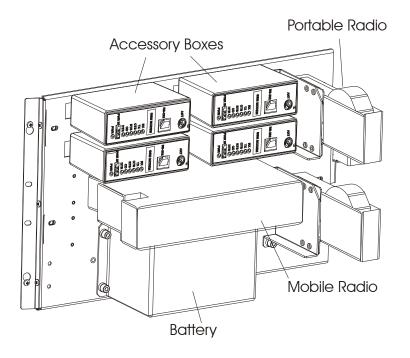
Installation of ACE3600 RTU 19" Rack Accessories - General View
